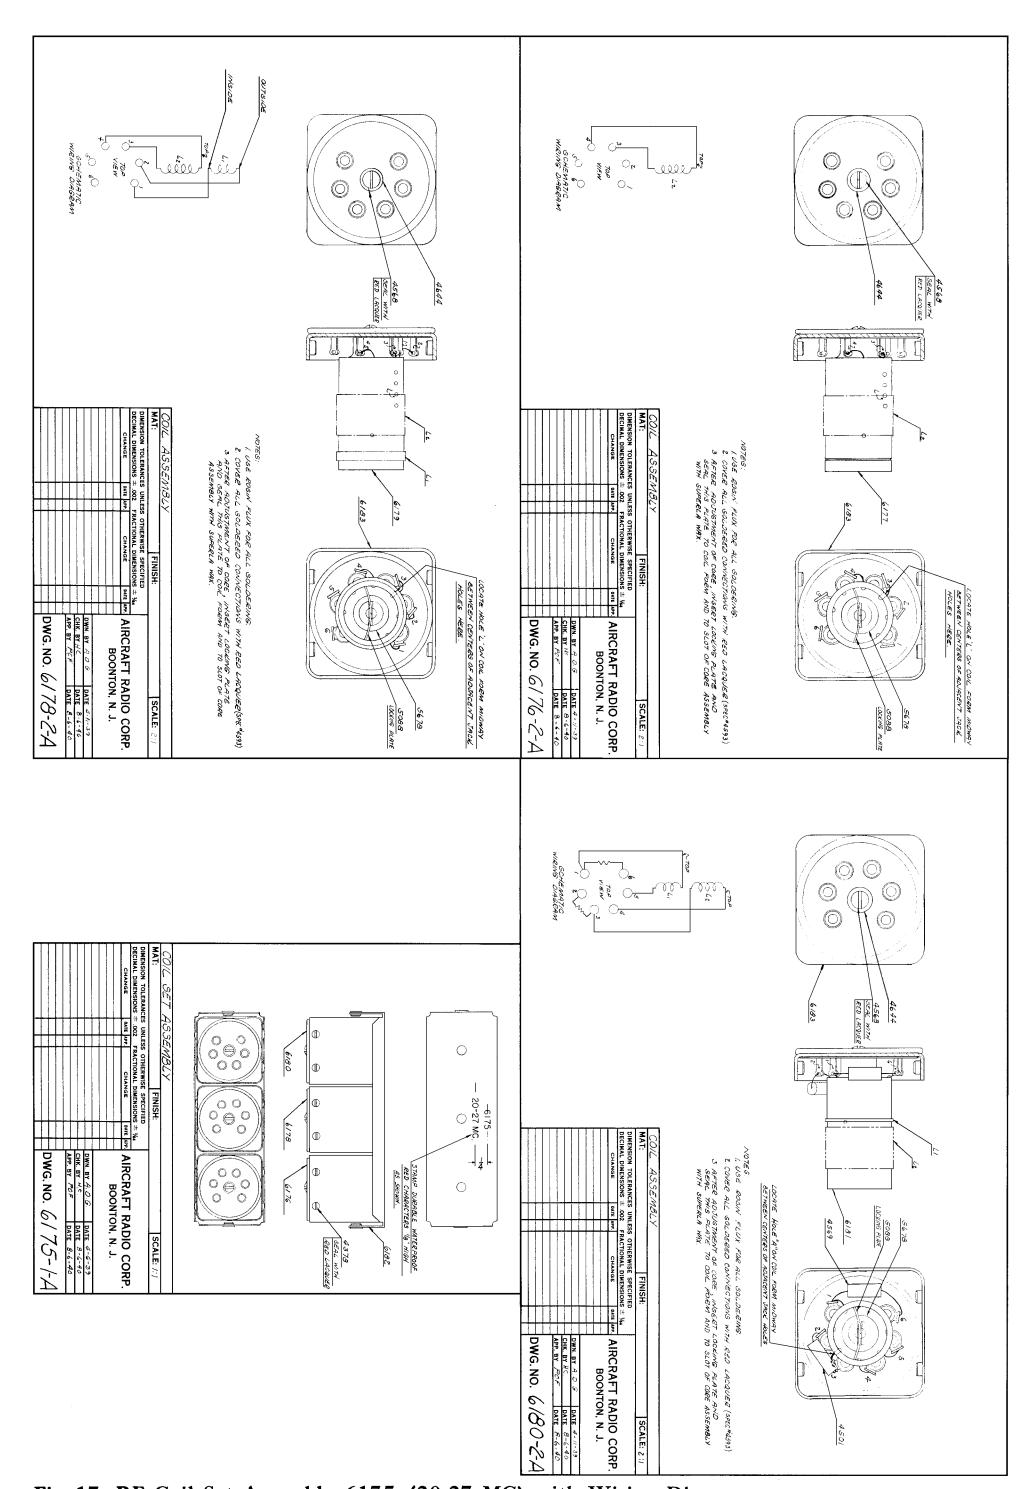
RF Coil Set Assembly 6175, (20-27 MC) with Wiring Diagrams
